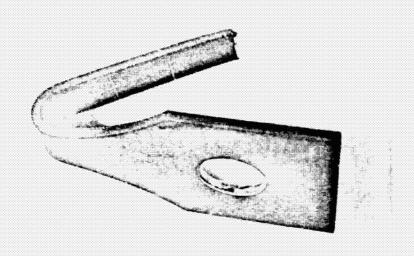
INCO 617 10-Hour Tensile Specimen Bend Test
